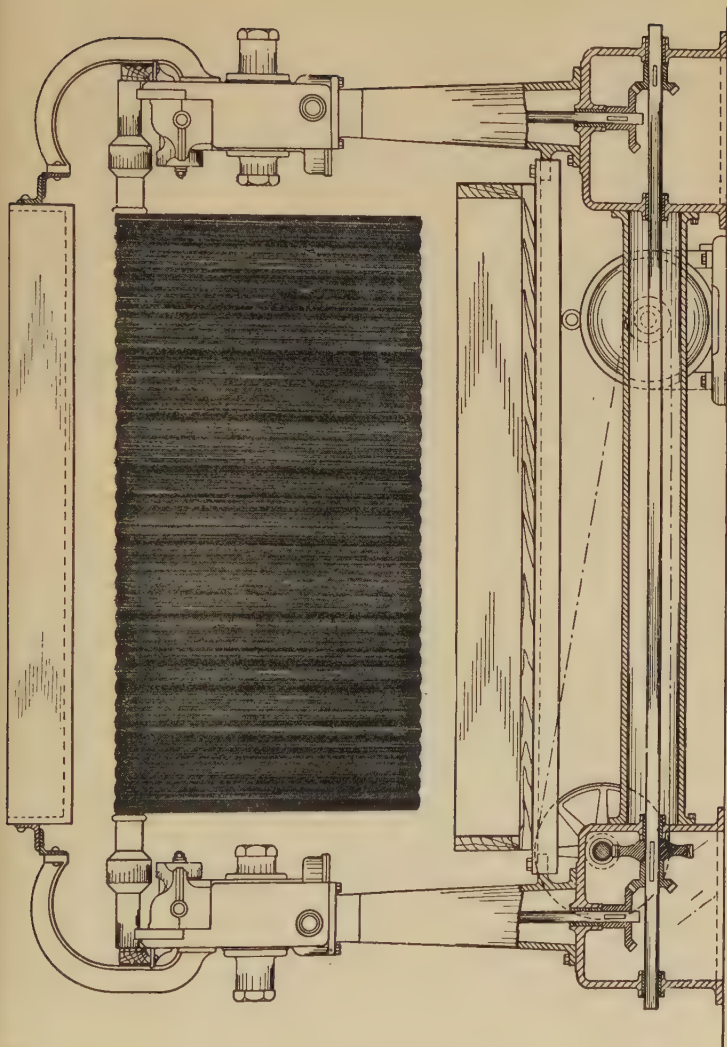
Front View of Automatic Skein Washing, Bleaching and Dyeing Machine. (Courtesy Wm. W. McElrath.)
